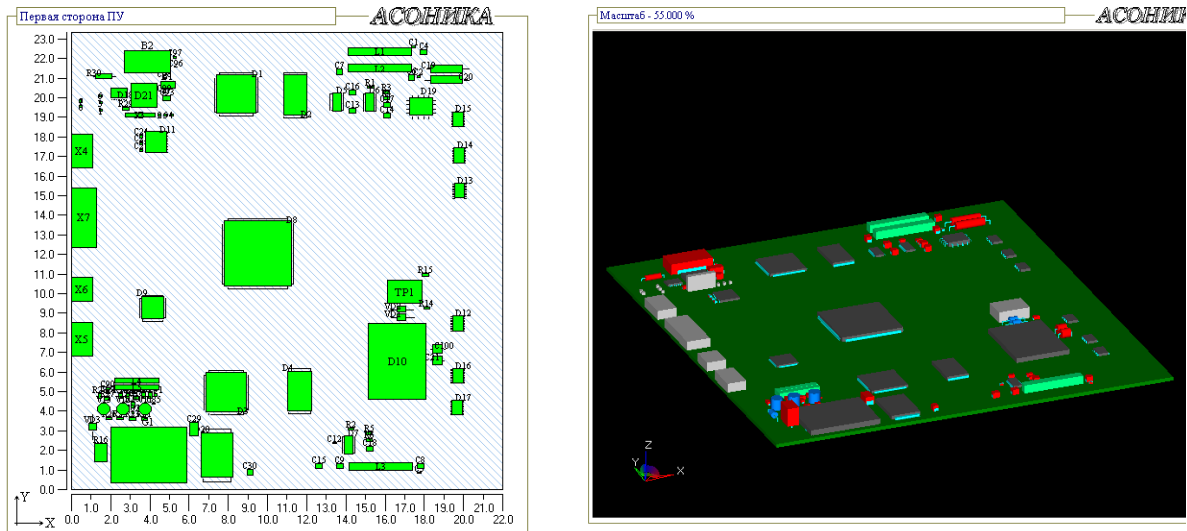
Design of printed assembly in the subsystem ASONIKA-TM (side 1)
